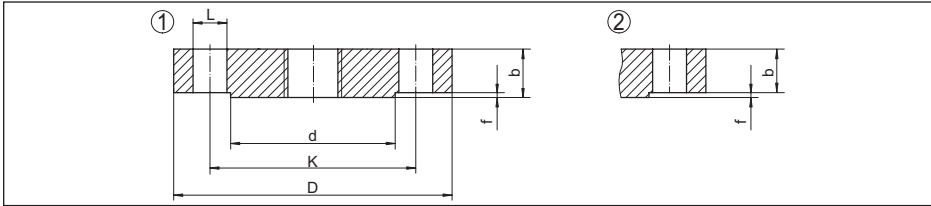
Dimensions: ASME flange B 16.5 (seal ledge RF)
